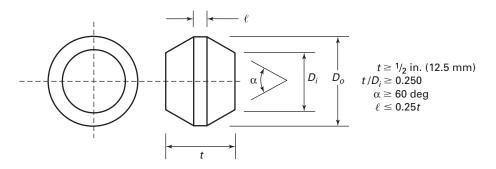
Standard Window Geometries – Part 1
